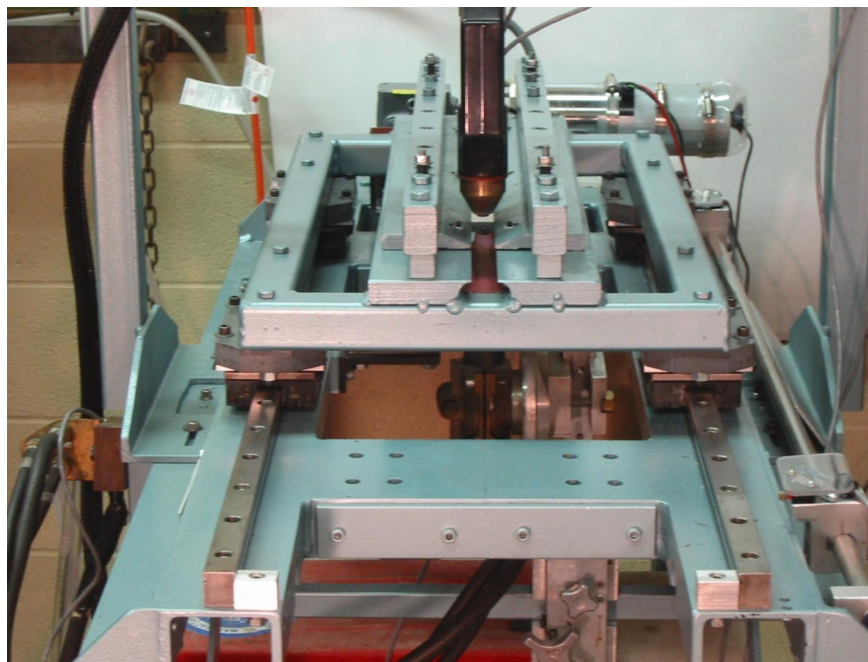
DSAW welding table, traversing carriage and PAW and GTAW torches (taken from Kwon [29]).
